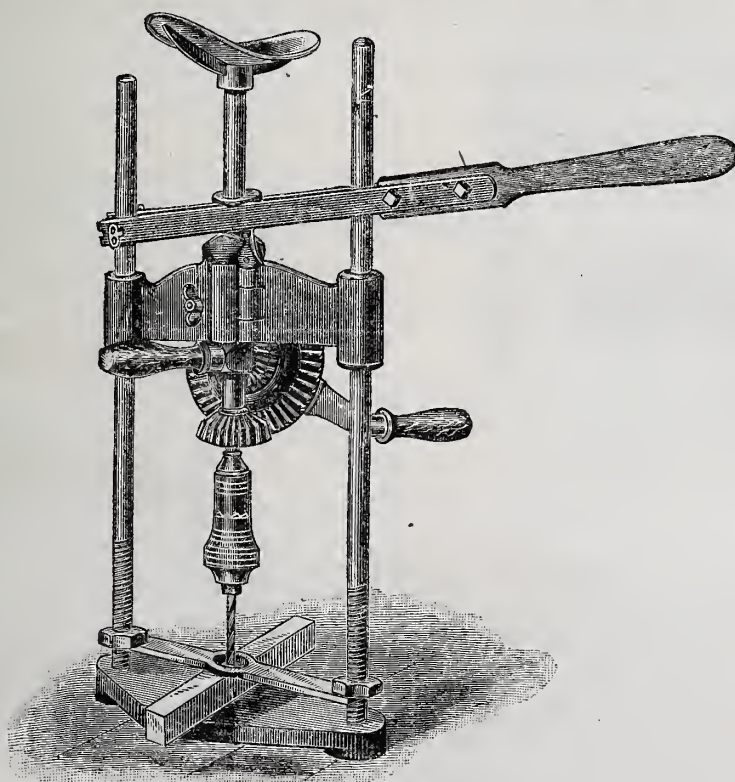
Mounted Breast Drill, Manufactured by the Millers Falls Co., New York.
